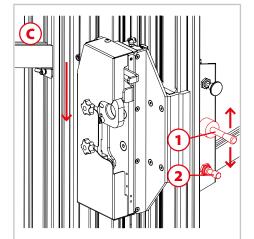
FIGURE C: Only UpperCut Auto. Push down the joystick (1) to move the cutting head down and cut the material. The joystick has to be kept pressed during the whole cut. Move the joystick upwards to return the cutting head to the upper position. No need to keep it pressed, it holds by itself. Adjust the cutting speed through the speed regulator (2).
